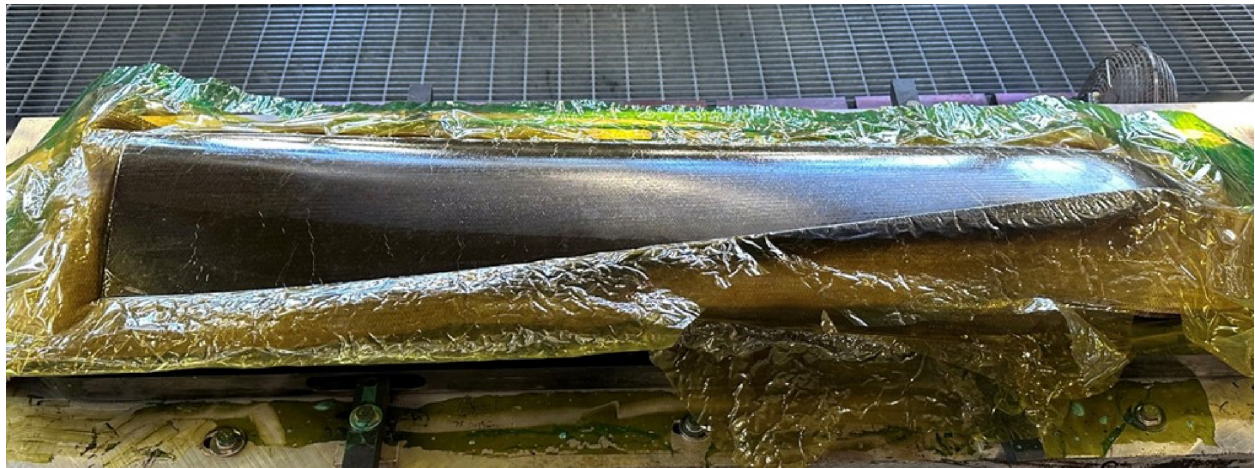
Composite propeller in polyimide liner still on bottom plate after opening mold.
